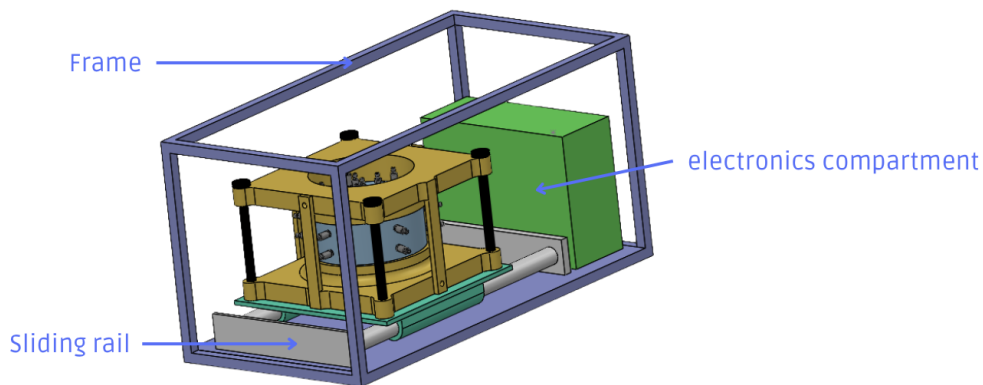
Complete assembly of the test bench with frame, linear guide, and embedded electronics
